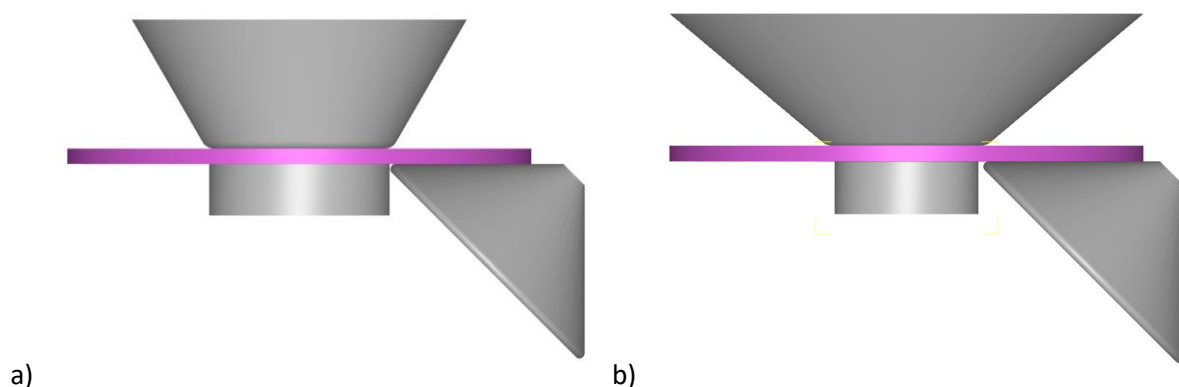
Example of Mandrel modifications. a) 20° Mandrel, b) 50° Mandrel.
